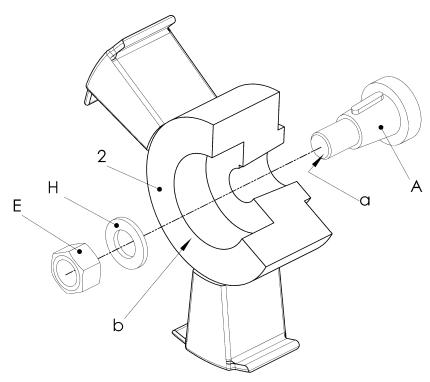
Mounting the hub assembly (2) with conical bore and keyway
